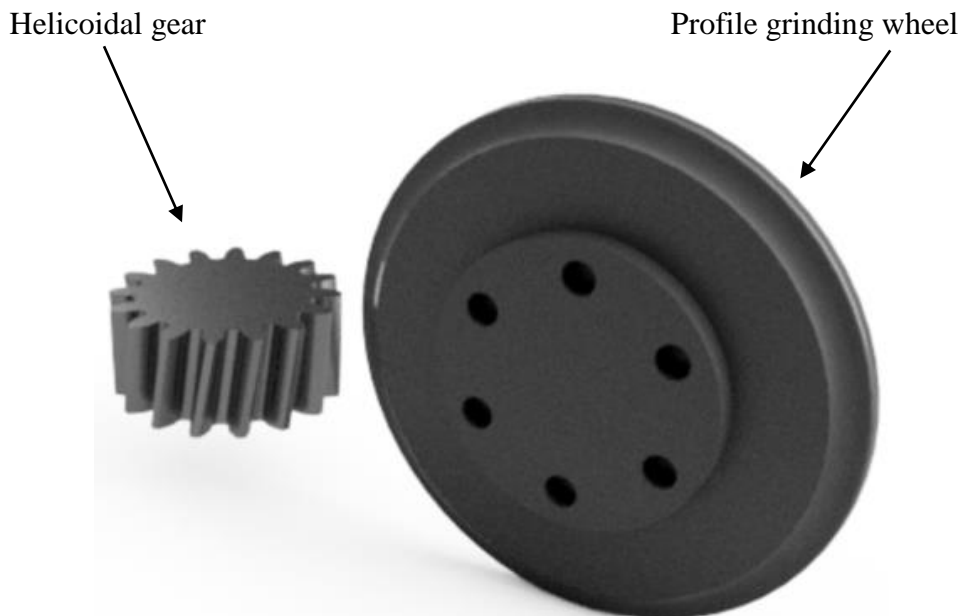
Schematic drawing for grinding helicoidal gear with profile grinding wheel.
